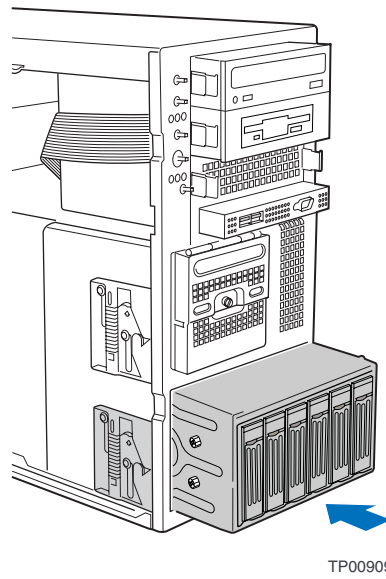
Installing Six-drive Hot Swap Drive Cage into Chassis
